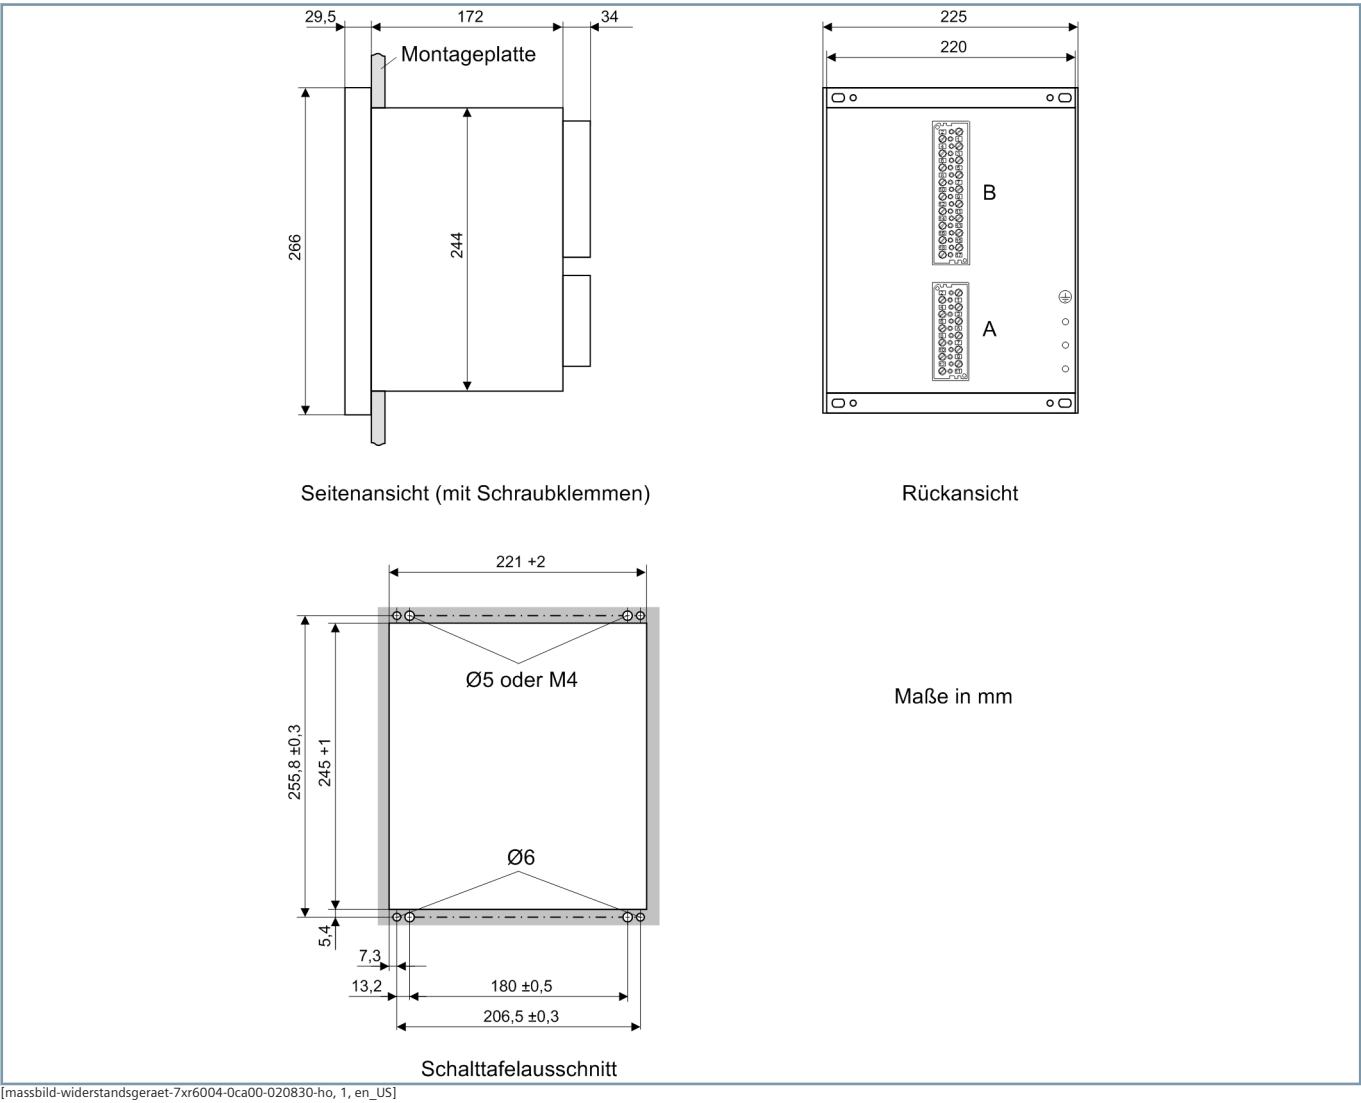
/6 Dimensional Drawing Resistor Unit 7XR6004-0CA00 for Panel or Cabinet Flush Mounting
